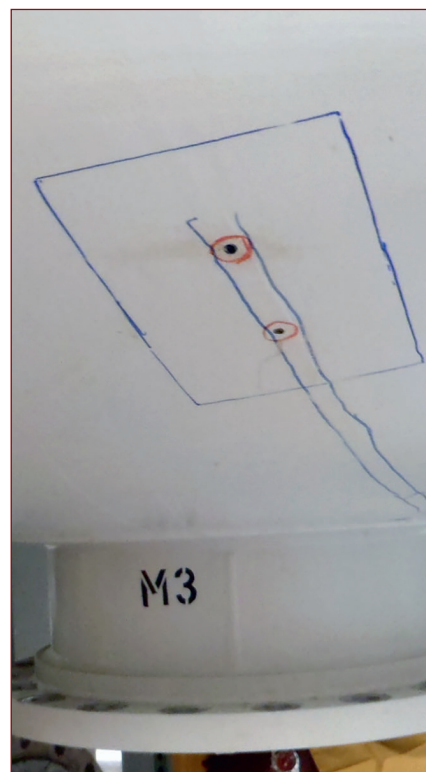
Leaking seam welds in a 2205 dual media filter vessel.
